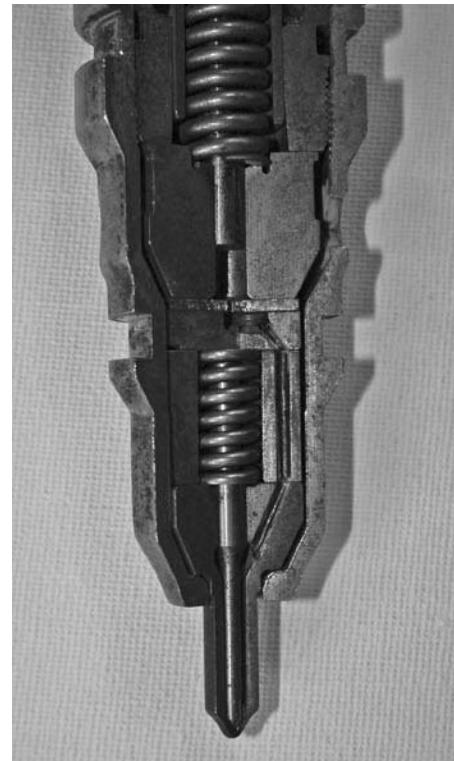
Sectional view of the hydraulic nozzle subassembly in a HEUI injector assembly: in this, the hydraulic nozzle is a subcomponent.
